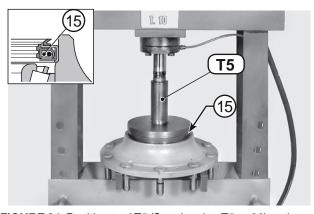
Position tool T5 (See drawing T5 p. 29) and press the seal ring (15) into its seat.
